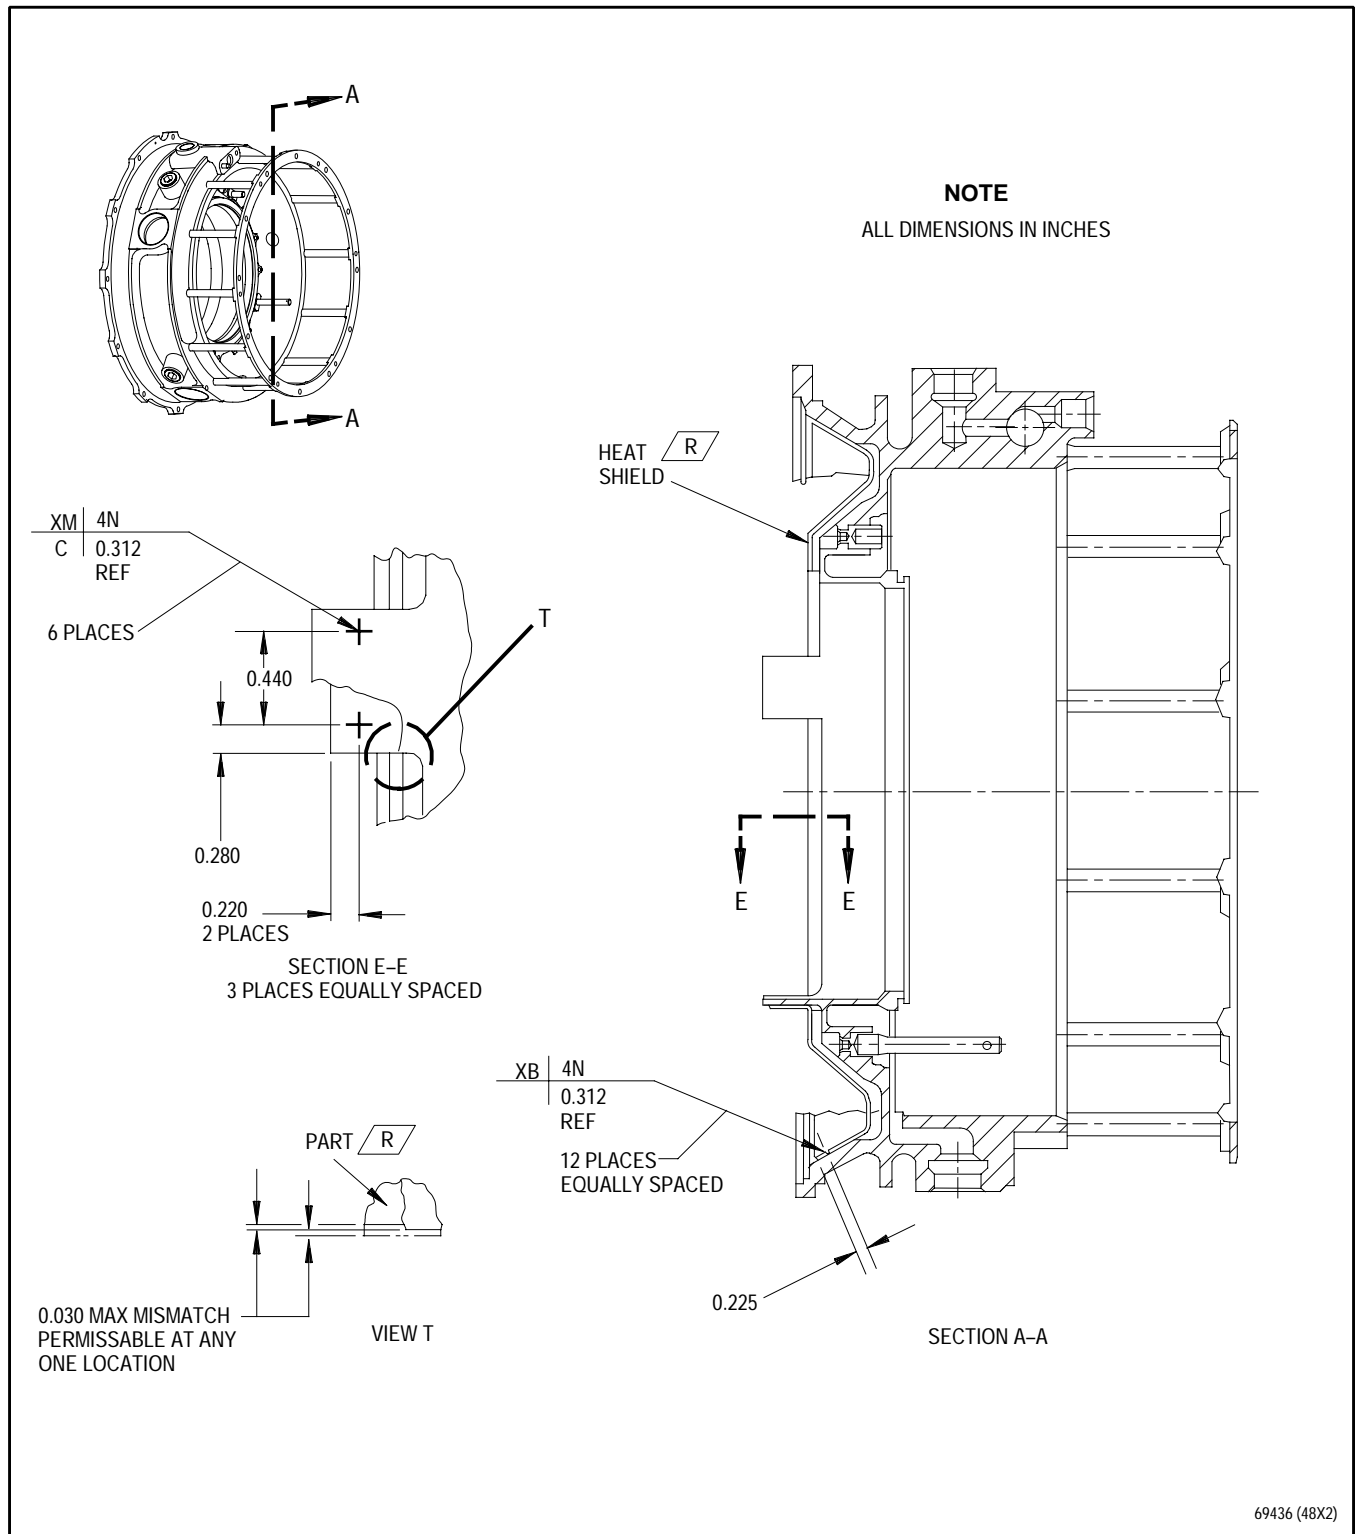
No. 5 Bearing Seal Assembly - Heatshield Replacement
